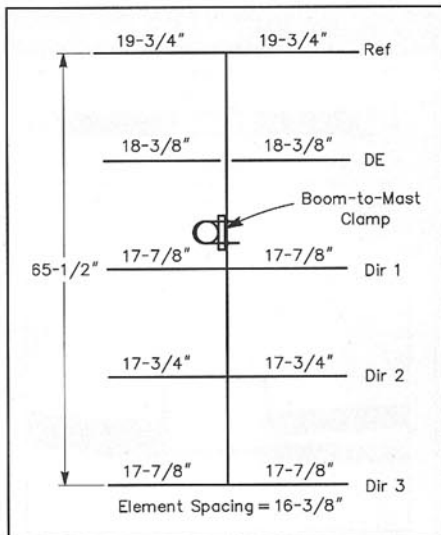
Dimensions of the five-element 2-meter Yagi. The stub is inside the driven element (see text).
